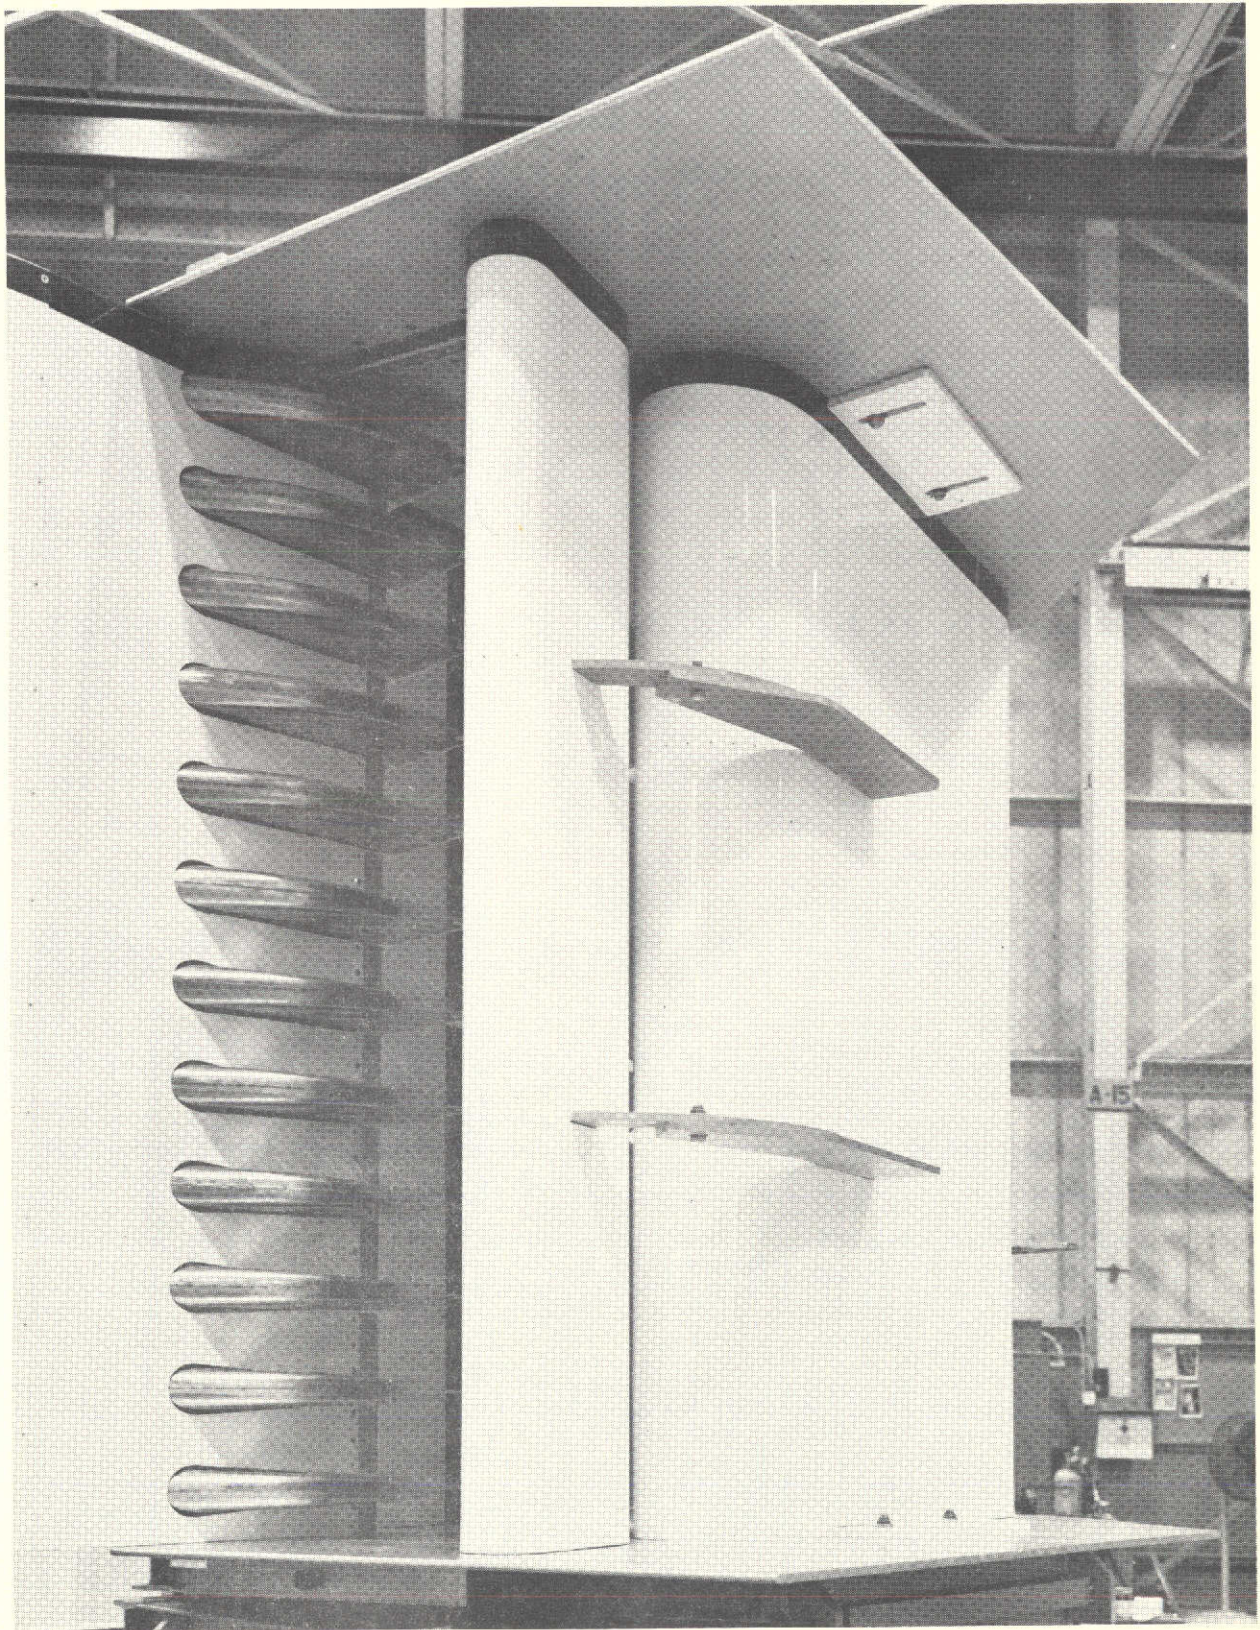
FLAP SYSTEM ASSEMBLY
